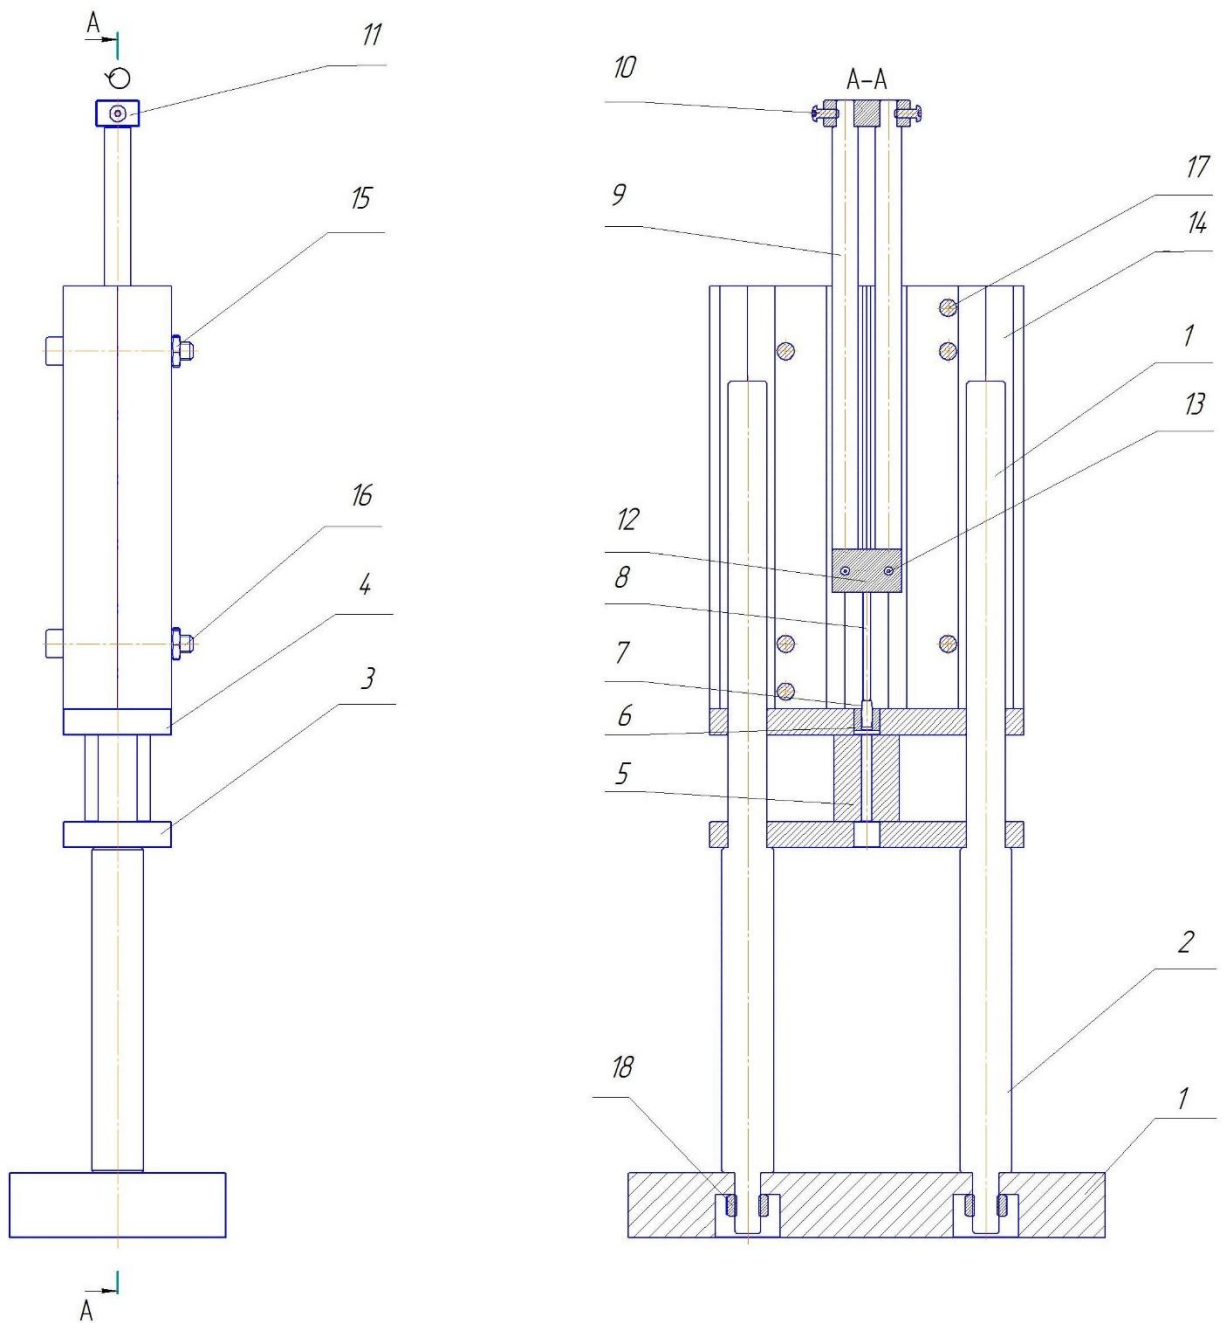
Machine for small diameter deep bore burnishing with prismatic pusher guides.
